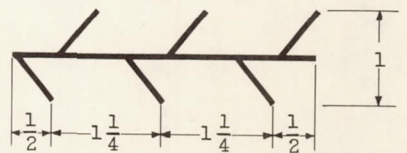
Sketches of type 2 flame holding elements investigated. (All dimensions in inches.)
